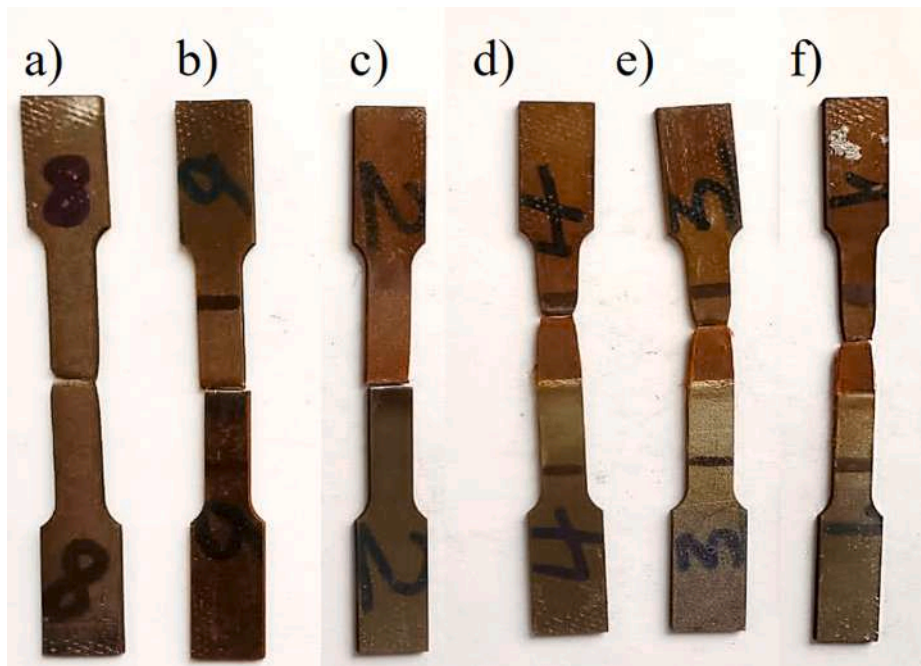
Failure appearance of tensile tests of welded samples for EXP No. of a) 3, b) 15, c) 27, d) 19, e) 17, f) 24.
